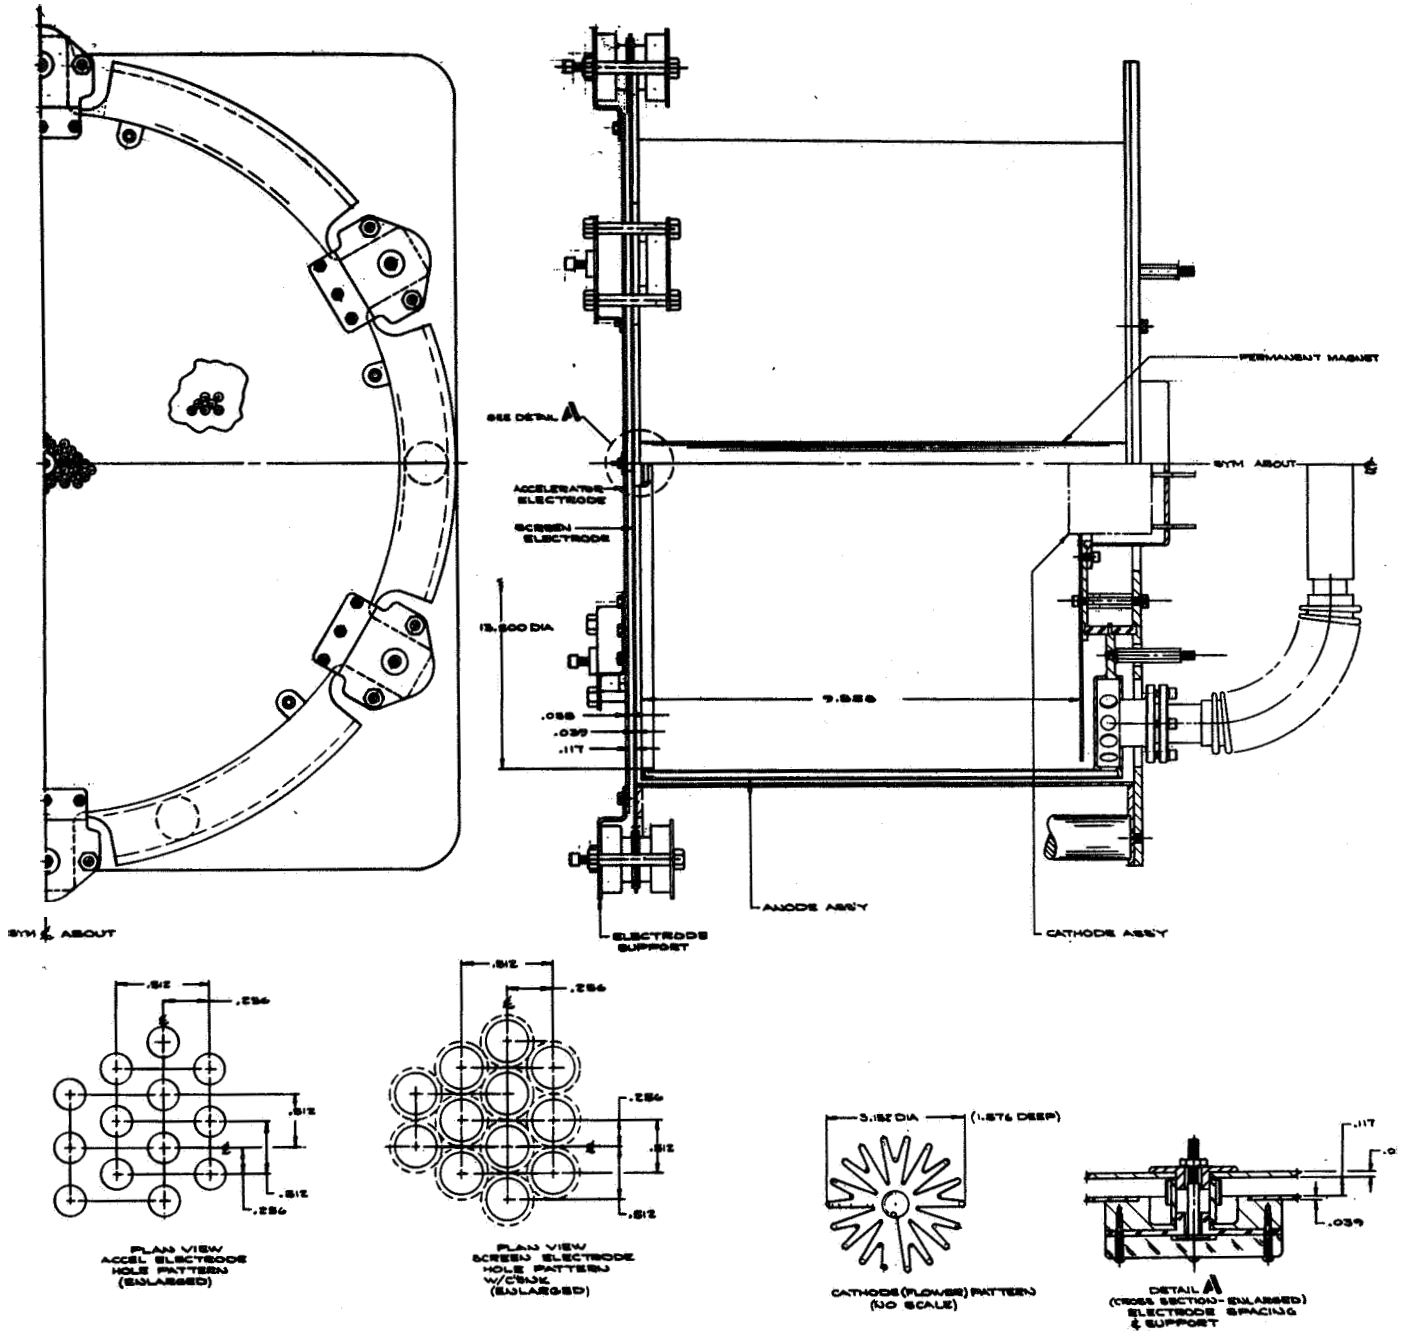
Detailed design of thruster module - 35 cm mercury bombardment ion engine.
